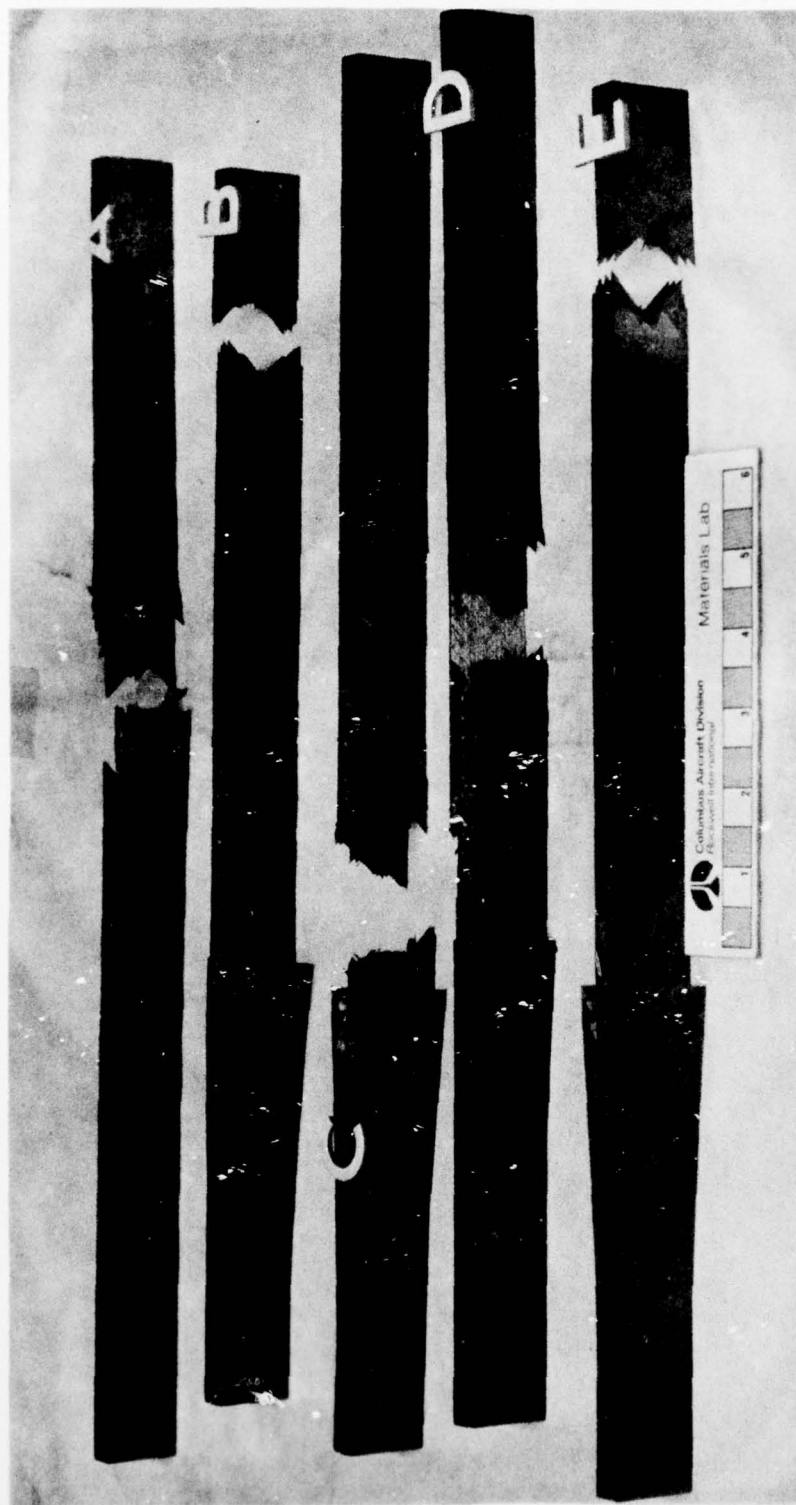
FAILED AXIAL LOAD SPECIMENS - PRECURED FACINGS WITH REVISED STACKING ORDER
